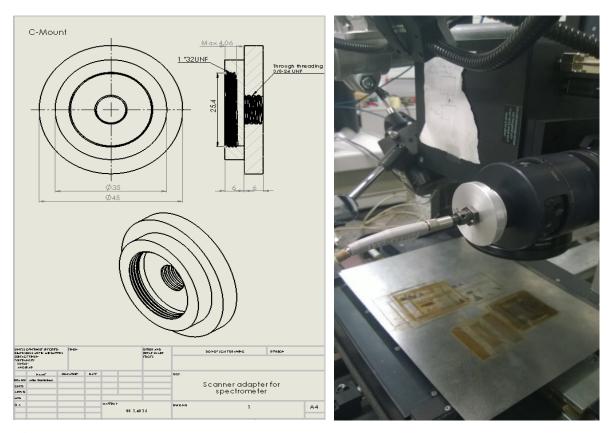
CAD drawing of the adapter and the manufactured adapter.
